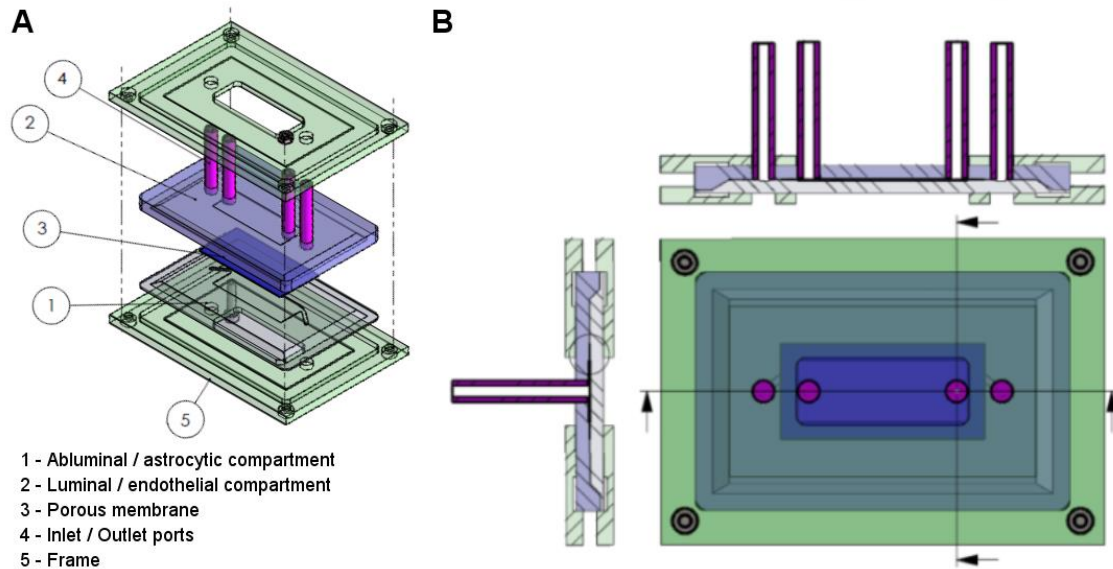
Exploded view of the parallel-plate flow chamber assembly (A) and top and lateral views of the assembled device (B).
